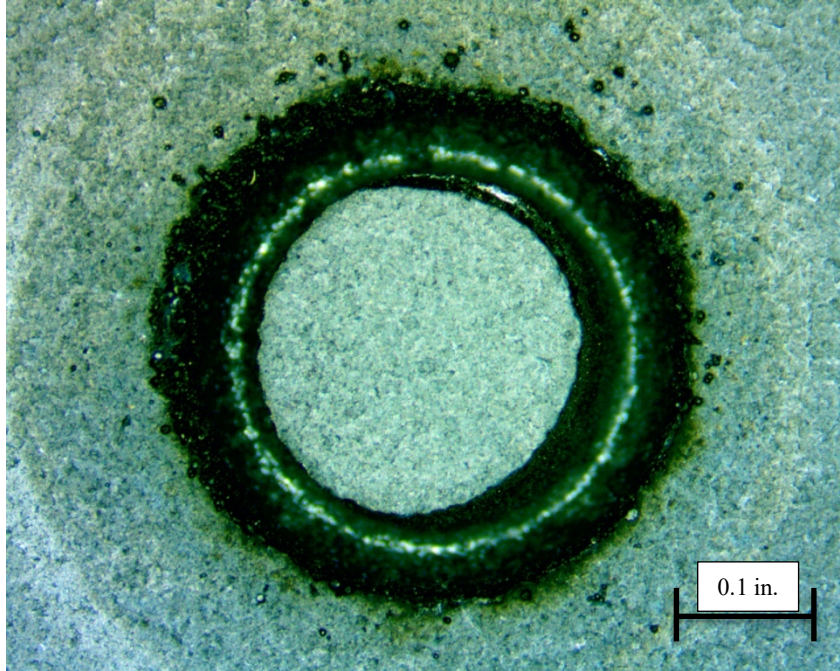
Task 1.2 Cut 2 with a Cut Depth of 0.1 in., an Electrode Diameter of 0.33 in., and a Fastener Material of Inconel
